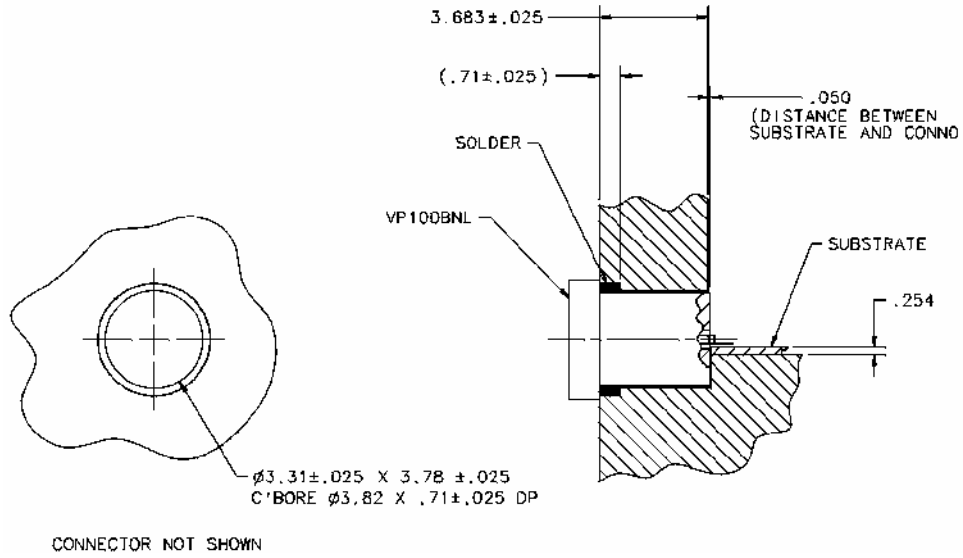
VP100CNL Mounting Hole Dimensions and Assembly Drawing for Thick-wall housing
